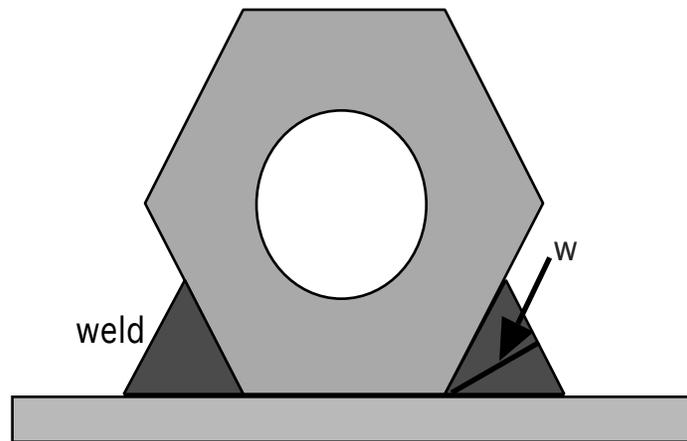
The geometry of the weld holding the nut to the prong base-plate.
